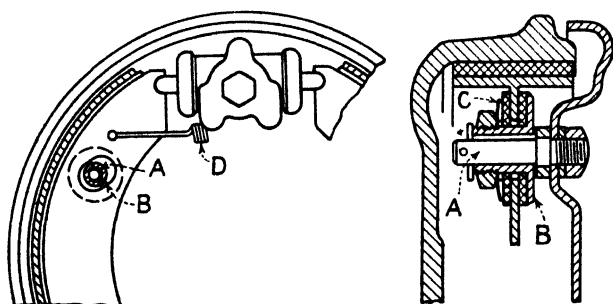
MERCEDES AUTOMATIC BRAKE ADJUSTER.
